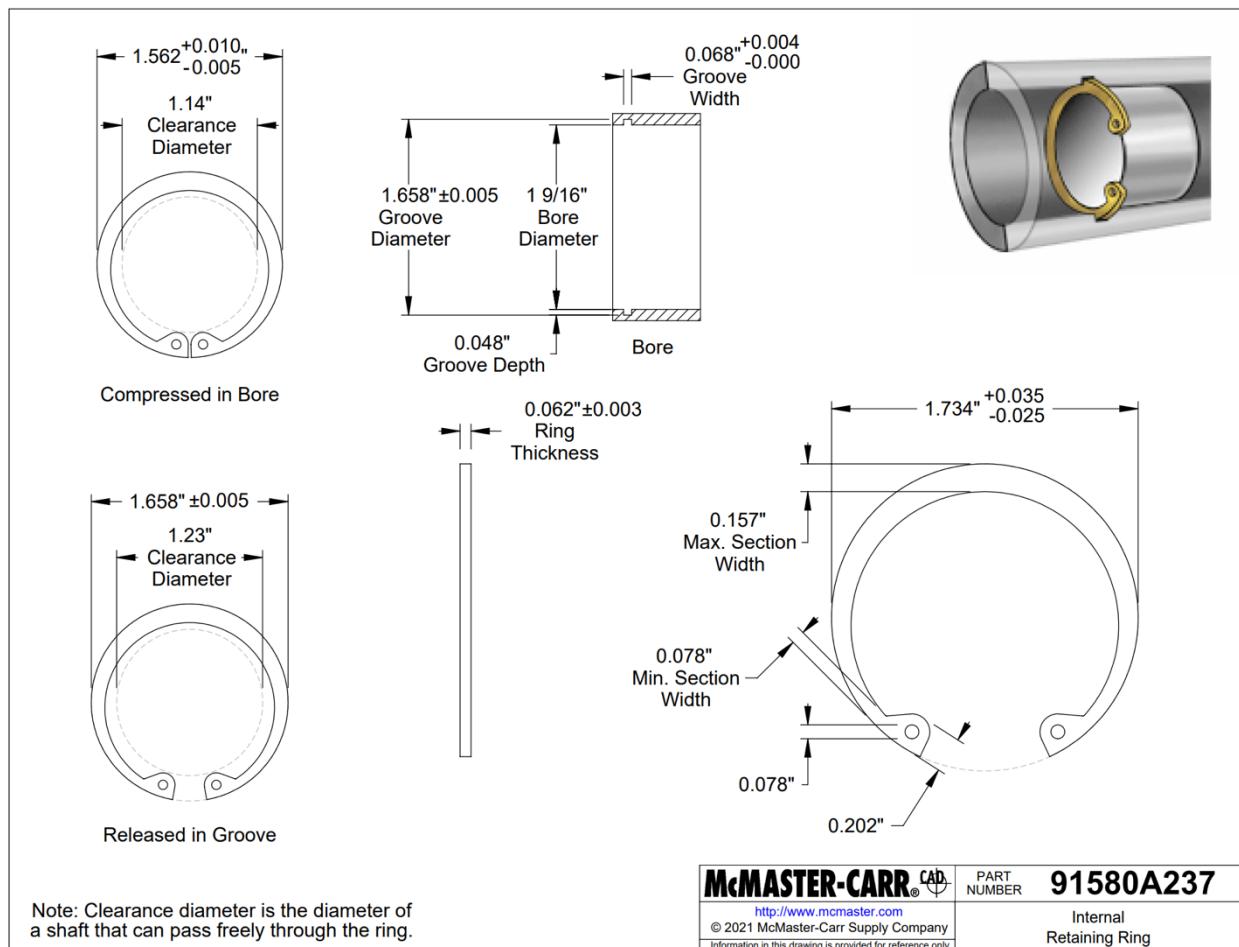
2D CAD drawing of the 91580A237 Retaining Ring
